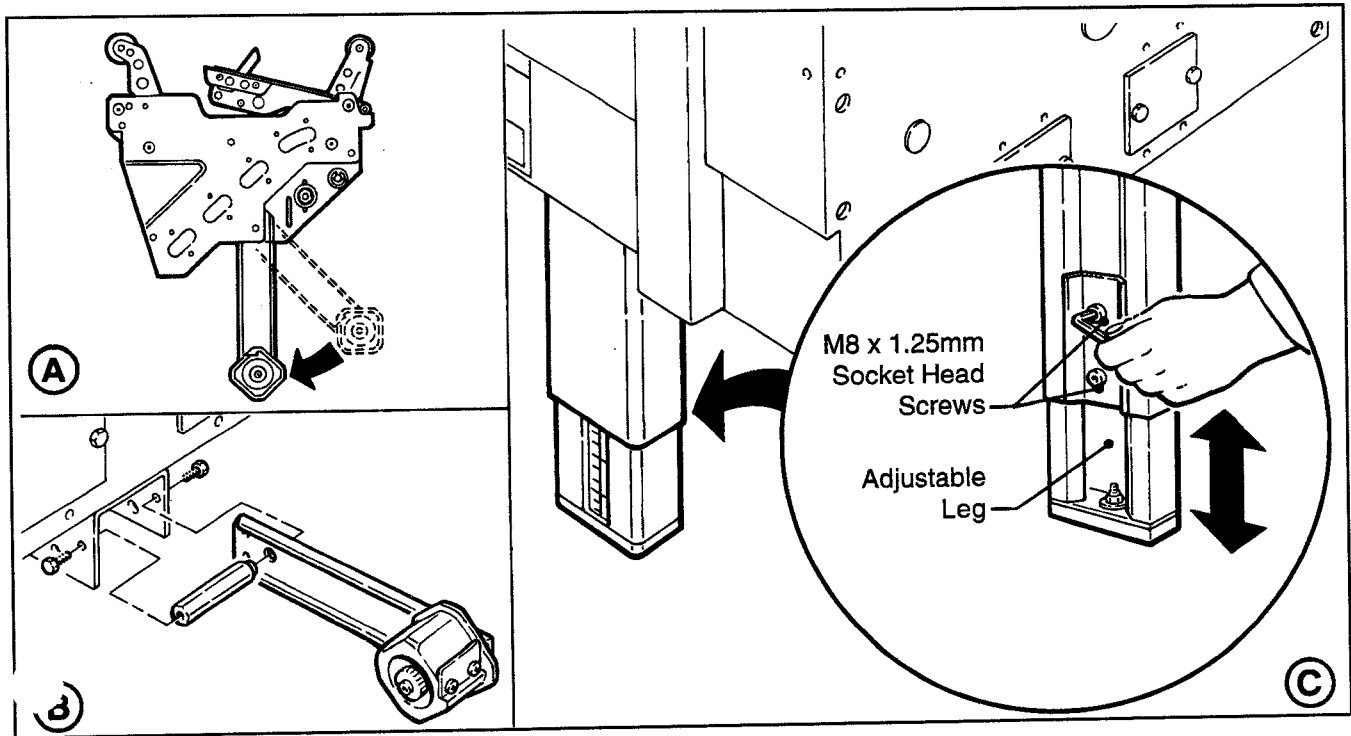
Conveyor Bed Height Adjustment and Lower Tape Drum Bracket Position
